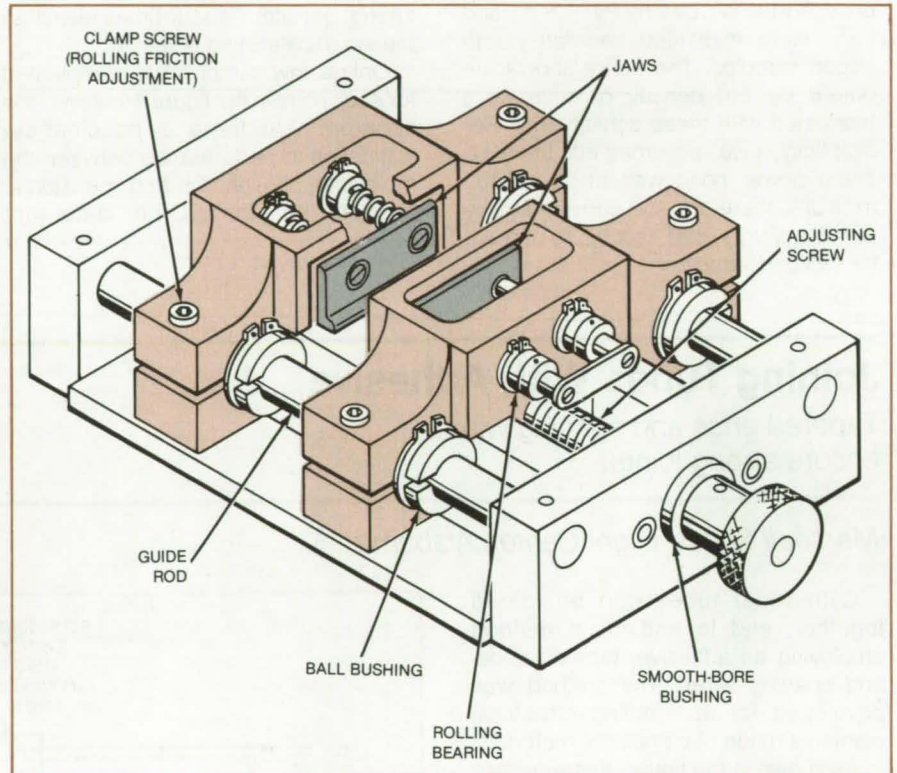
The Crystal-Cleaving Vise holds a workpiece firmly but gently. Its bushings, shafts, and adjusting screw are designed to move the jaws smoothly and uniformly with great tactile sensitivity so that they align the crystal and hold it for a clean cut.
